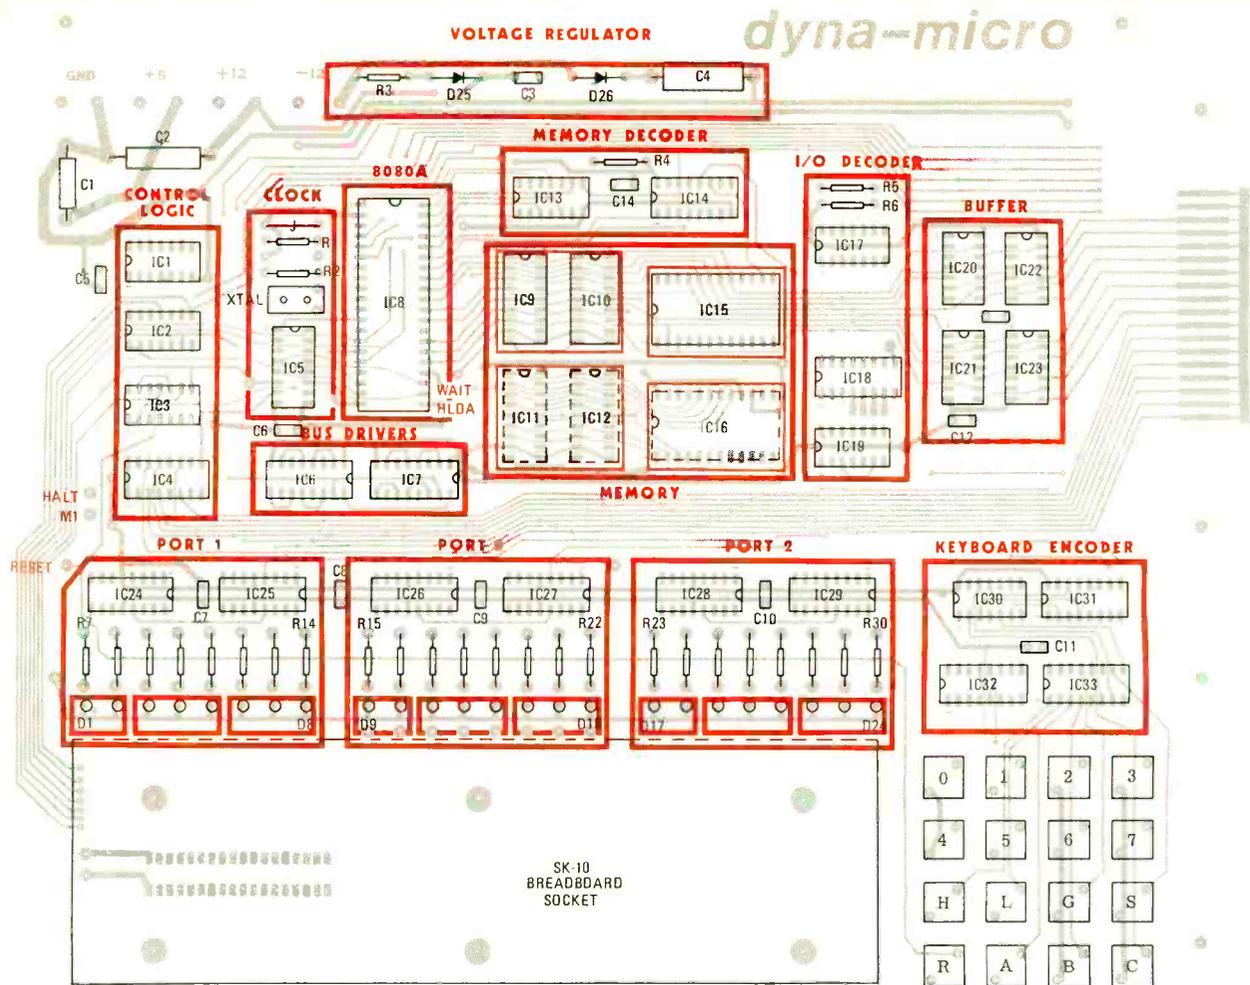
COMPONENT PLACEMENT diagram. The board is shown divided into functional sections.
